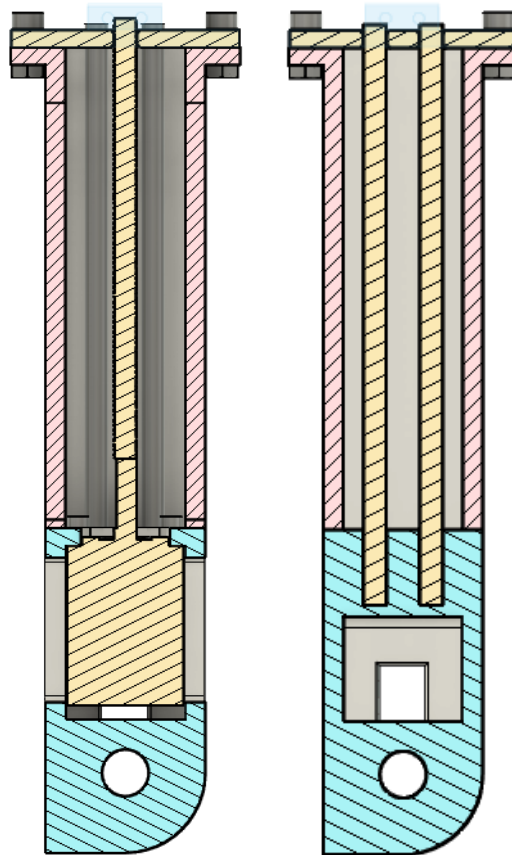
(Left) Section View of the Motor and the Lead Screw. (Right) Section View of the Guide Rods and their Press Fit into the Frame.
